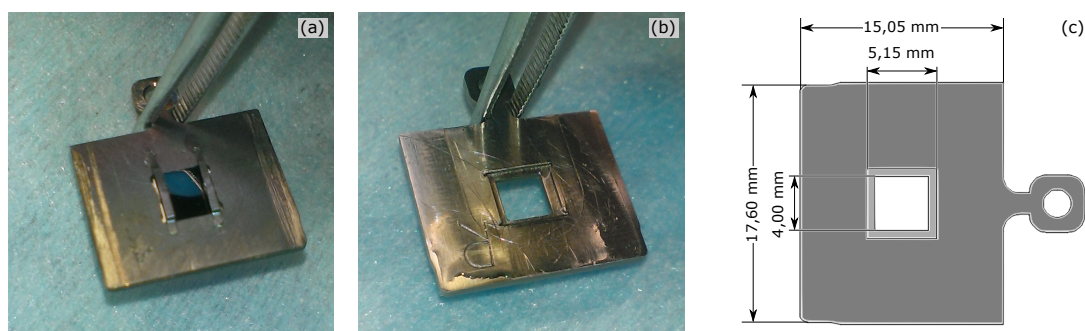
(a) Photo of a sample mounted on a plate through clips. (b) Photo of a plate without a sample on it, revealing a hole in the pocket. (c) Exact drawing of a sample plate with dimensions.
